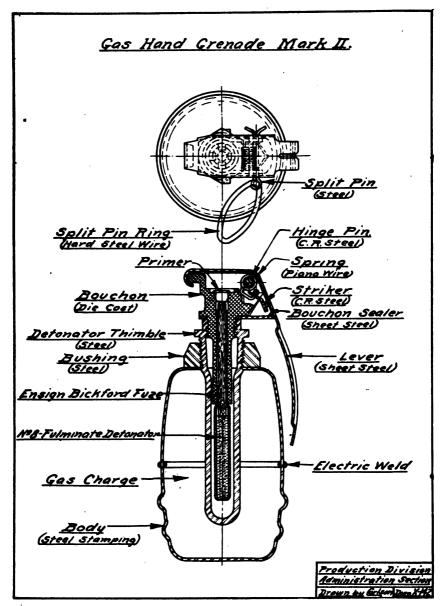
Sectional view of gas hand grenade, Mark II.
